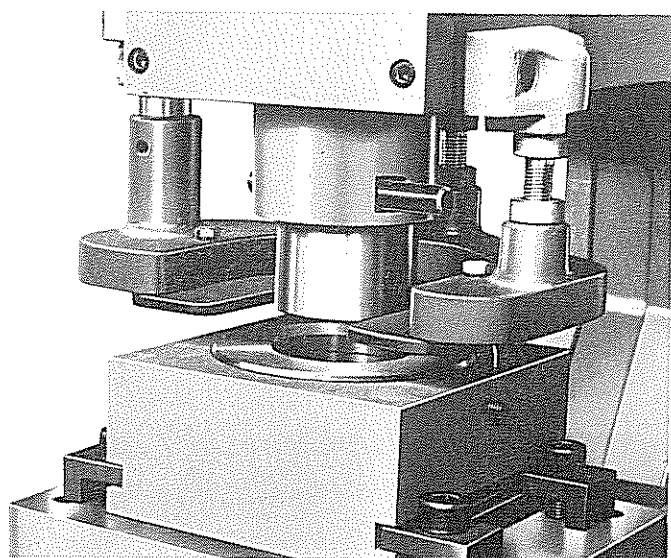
Special punching equipment for accommodating punches and dies with diameters exceeding 50,5 mm
